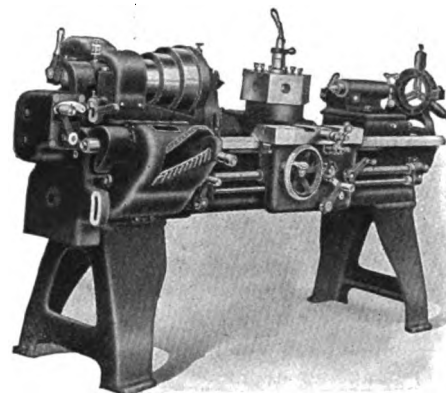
17-Inch Q. C., Double Back Geared, Cone Pulley Lathe with Carriage Turret
